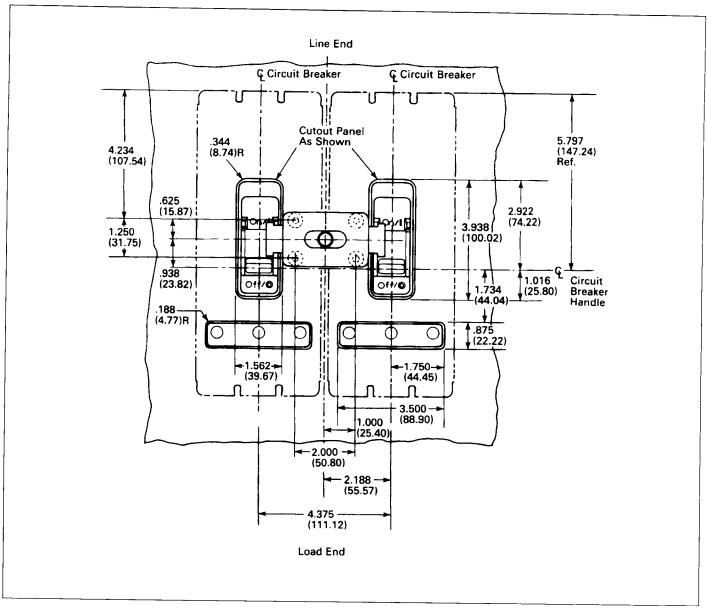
J-Frame Sliding Bar Interlock Installation Details
